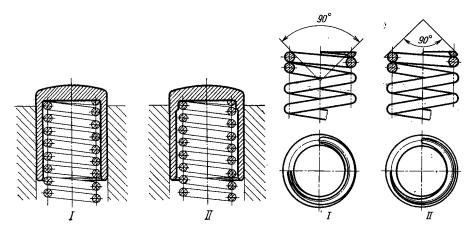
Springs centred in sleeve-type Fig. 351. Chamfered end coils parts I-incorrectly; II-correctly
